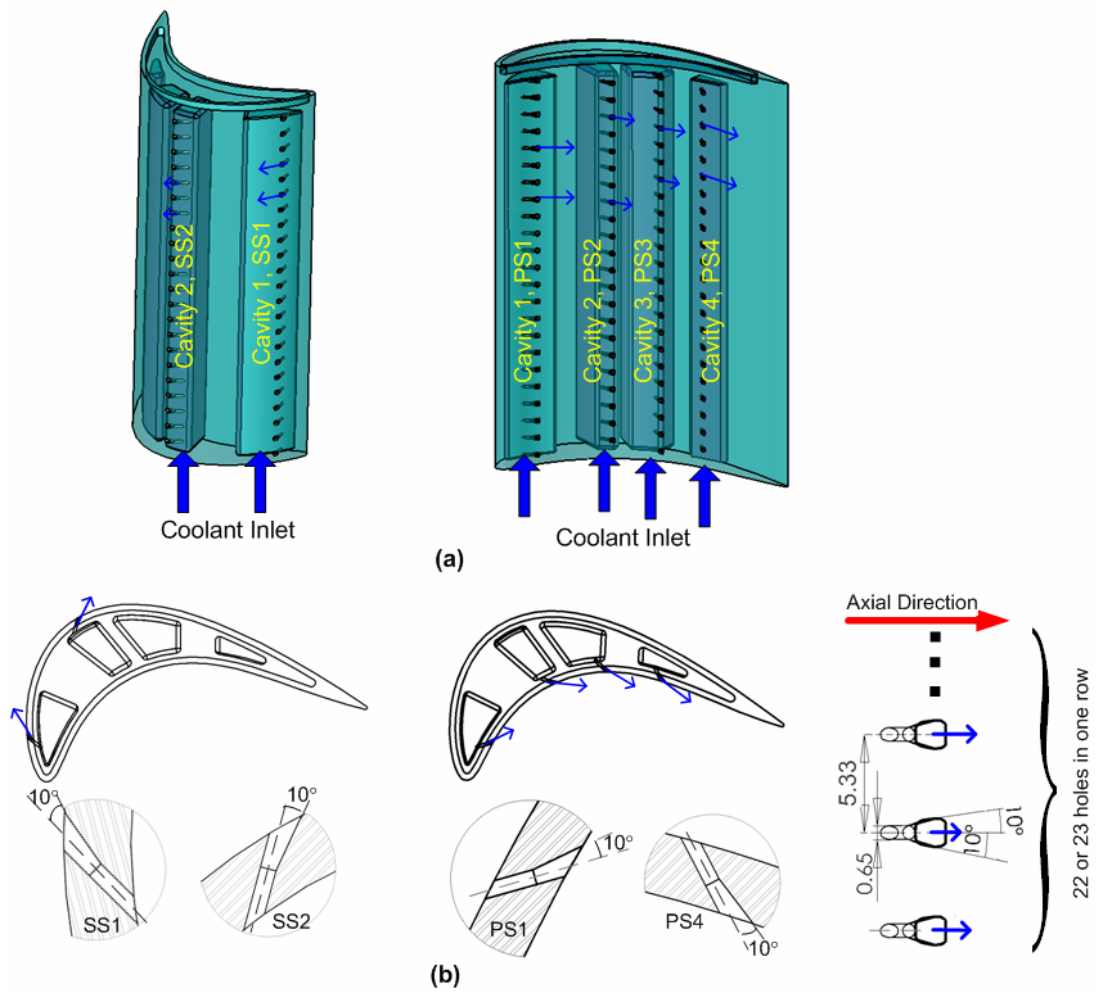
Film cooled blade with axial shaped holes (Blade 1)
